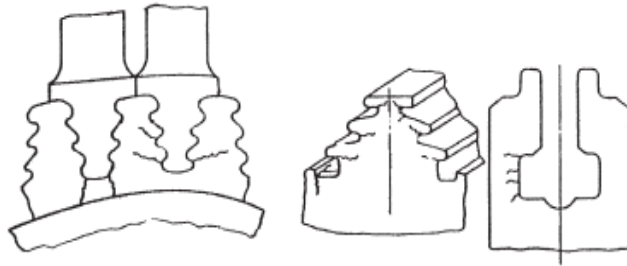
Fig. SCC at a Disc Rim in the Blade Attachment Zone
